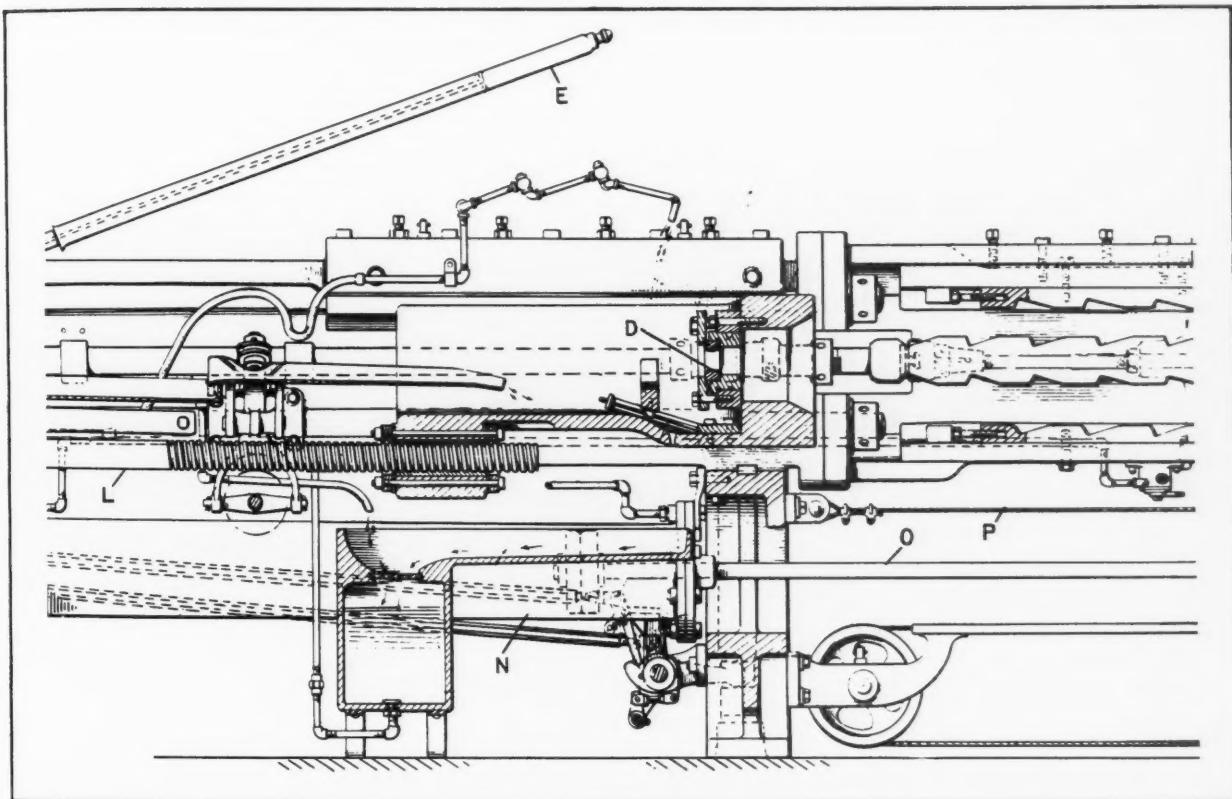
Central Section of Tube-drawing Machine Including Die-head and its Adjustable Slide—Reproduced from Original Drawing
